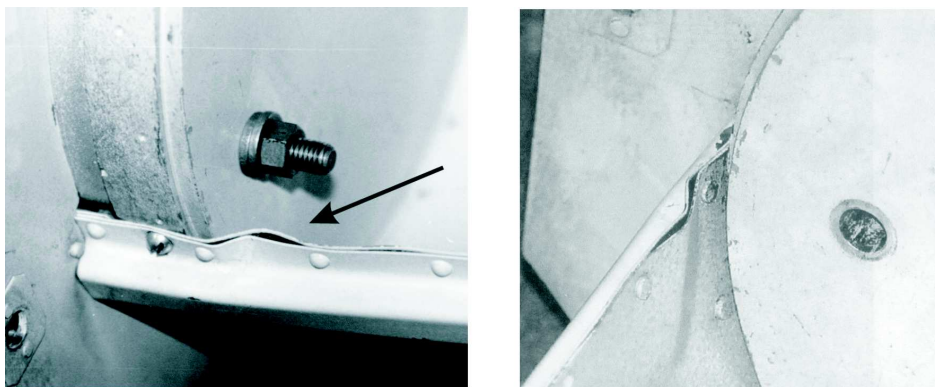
Post-buckling plastic deformation. Structure reinforced by closed section stiffeners
